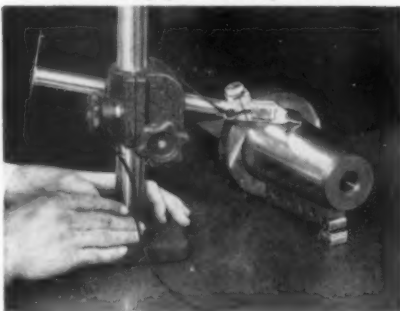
Checking ID of thread gage pilot. check straightness and taper. Tolerance is only .0001" per inch.
